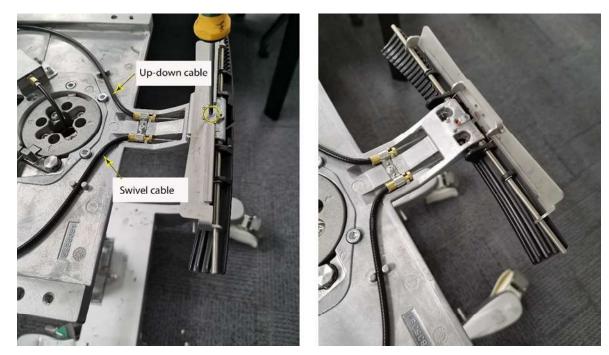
Protective Metal Plate Rotated 90 Degrees
